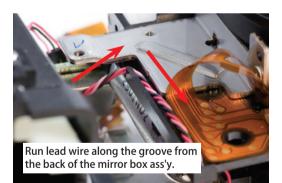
Routing the Lead Wire of the Mirror Box Ass'y
